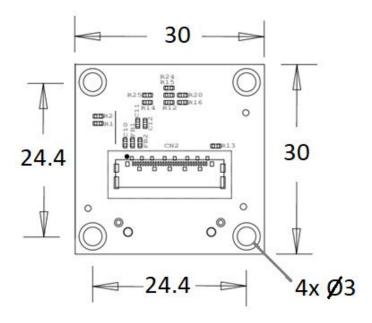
Rear View of e-CAM56_CUOAGX Camera Mechanical Drawing
